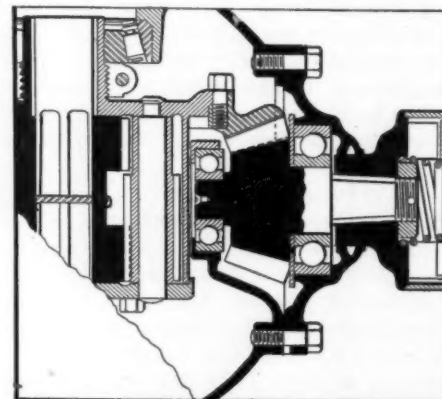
Section through a bevel drive, showing an annular type ball bearing on both sides of the bevel pinion and a dish support for the outboard bearing
